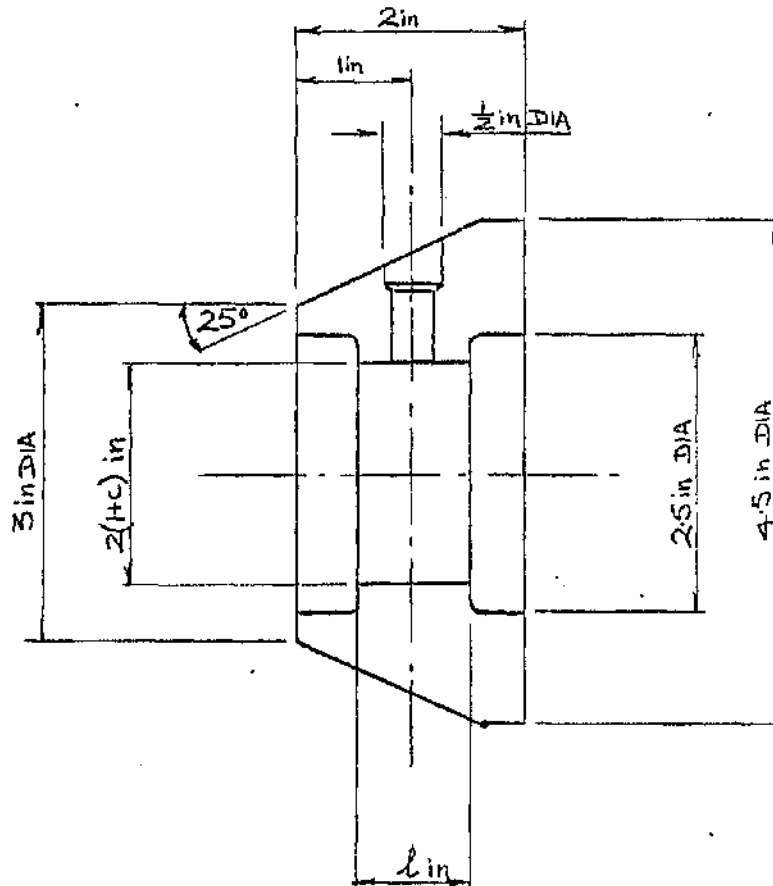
SECTIONAL VIEW OF SPECIMEN BEARING.
